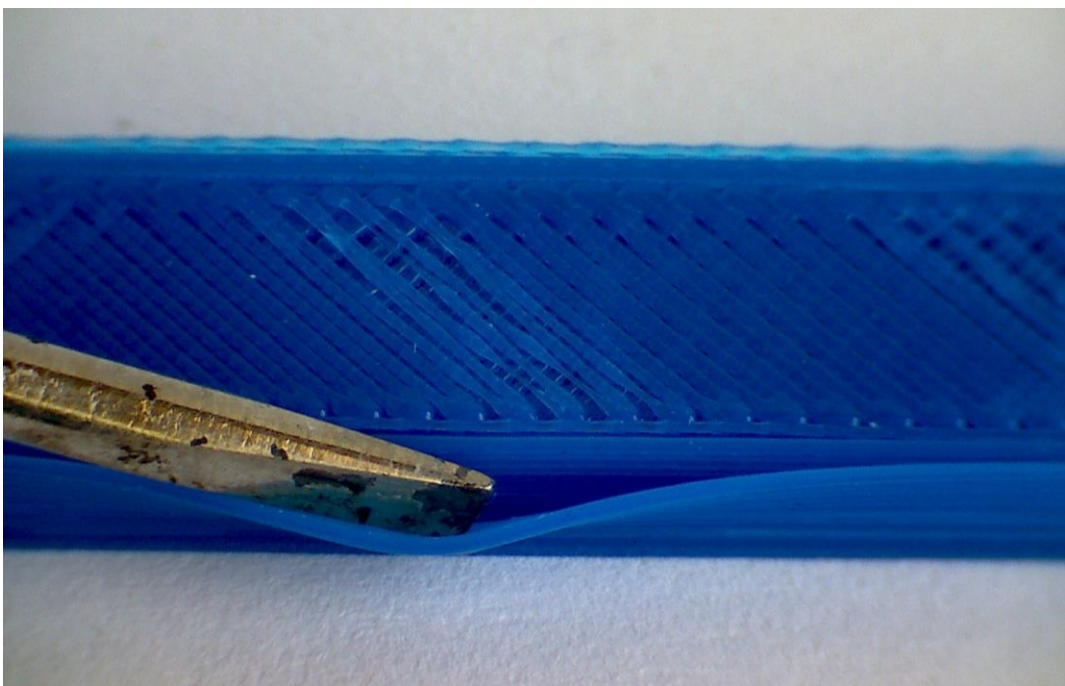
Specimen printed in PLA with, at the top, and without nozzle cooling below
